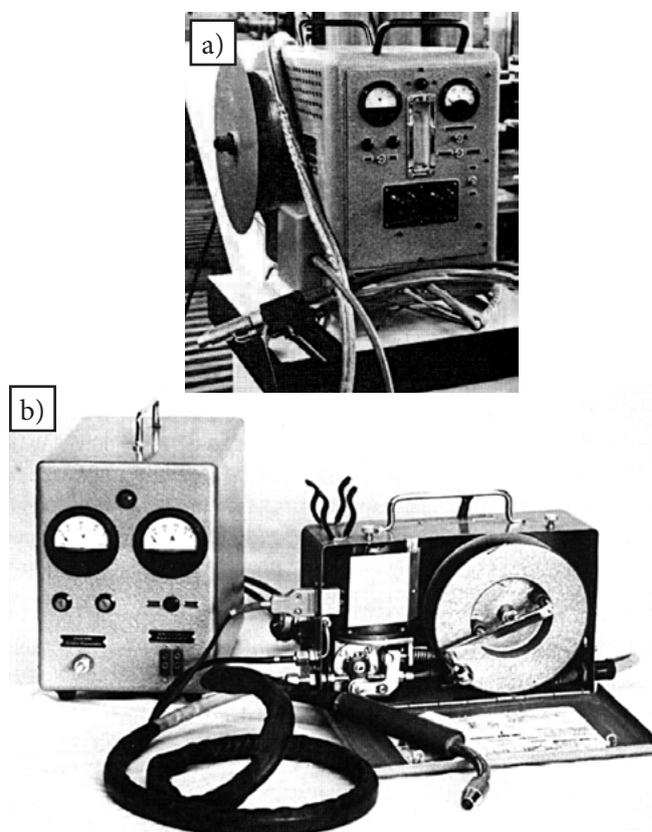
First Polish MIG welding machines, a- semiautomatic welding machine Ema-400, b- semiautomatic welding machine Ema-160 [17]
